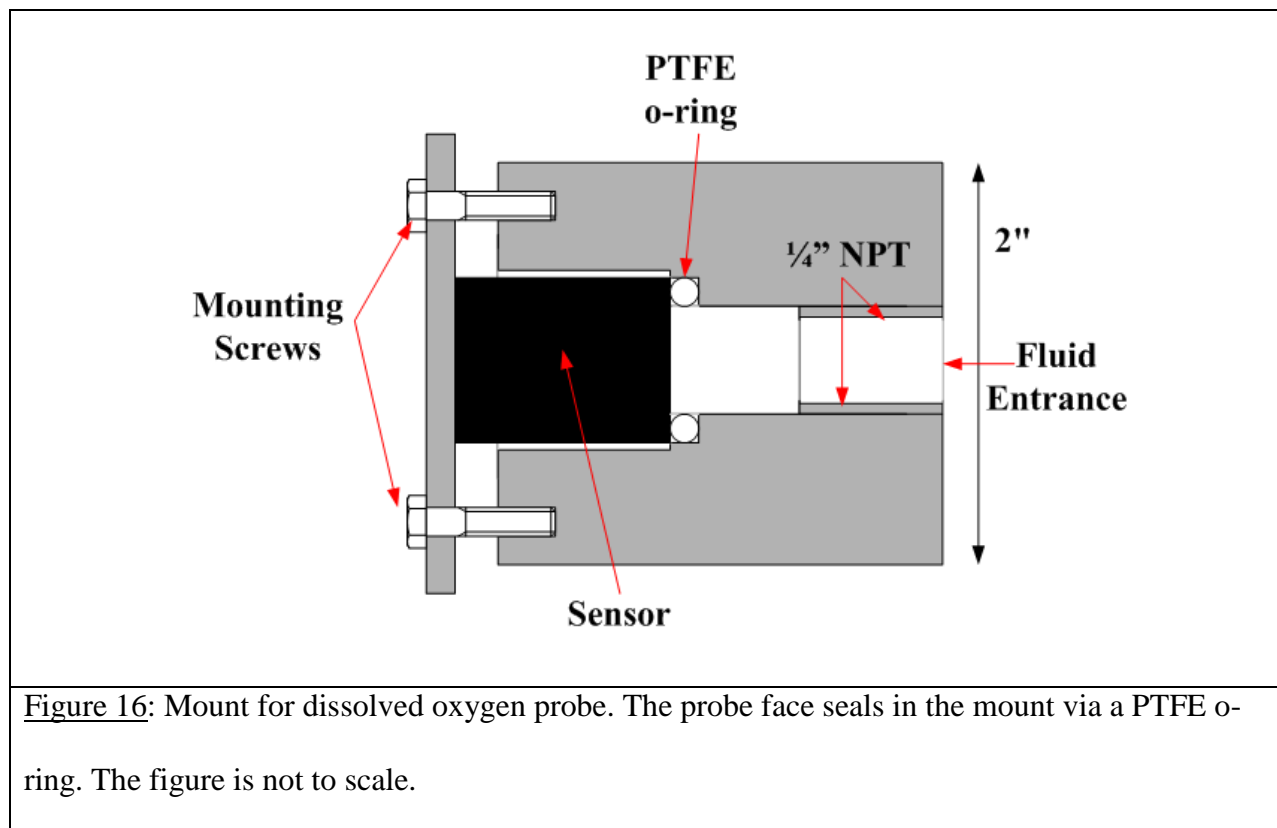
Mount for dissolved oxygen probe. The probe face seals in the mount via a PTFE o-ring. The figure is not to scale.
